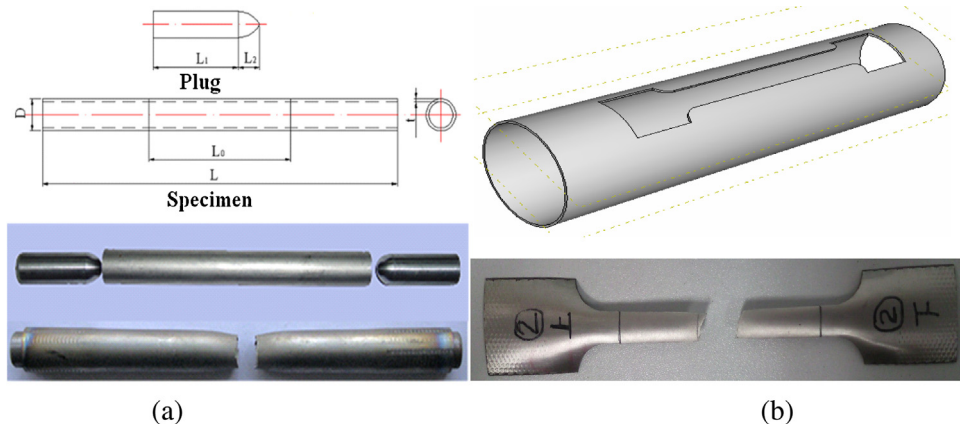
Specimens for uniaxial tension tests: (a) tubular section specimen; (b) arc specimen.
